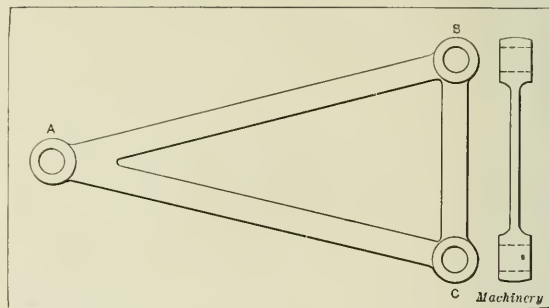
Malleable Iron Casting with Three Cored Holes to be bored
